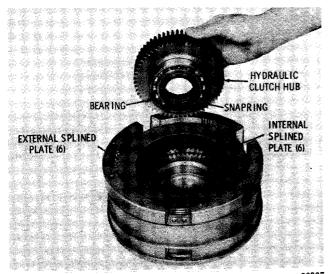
Removing hydraulic drive clutch hub (VS series)
